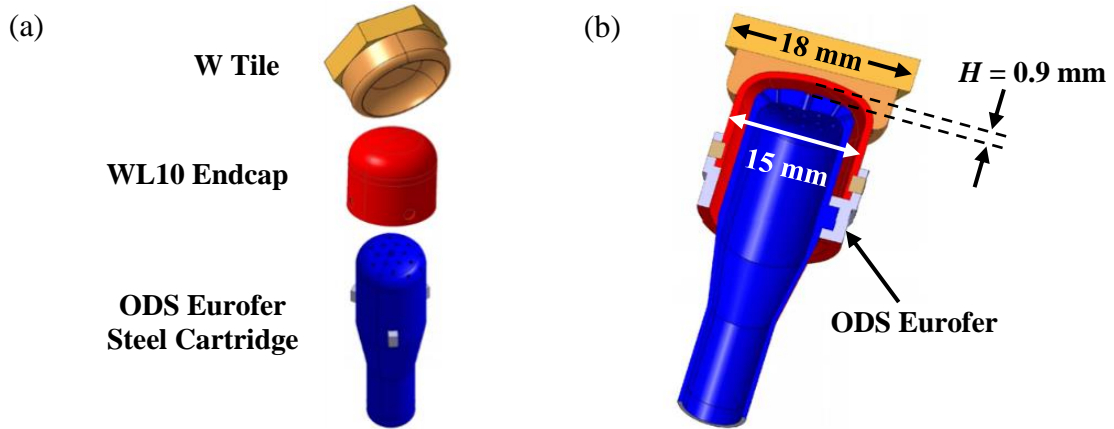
(a) Exploded view of the HEMJ divertor and (b) a cross-section of a single module [61].
